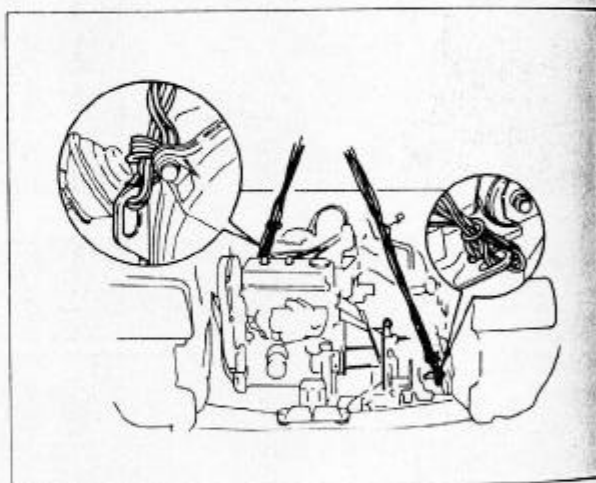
A — 97 LIFTING UP THE ENGINE ASSEMBLY
